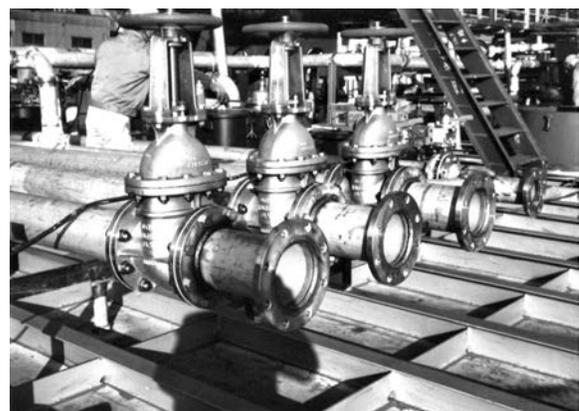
An application of DW-316L for fillet welding of the pipe fittings and pipelines equipped on the bridge and in the cargo tanks of a chemical tanker.
